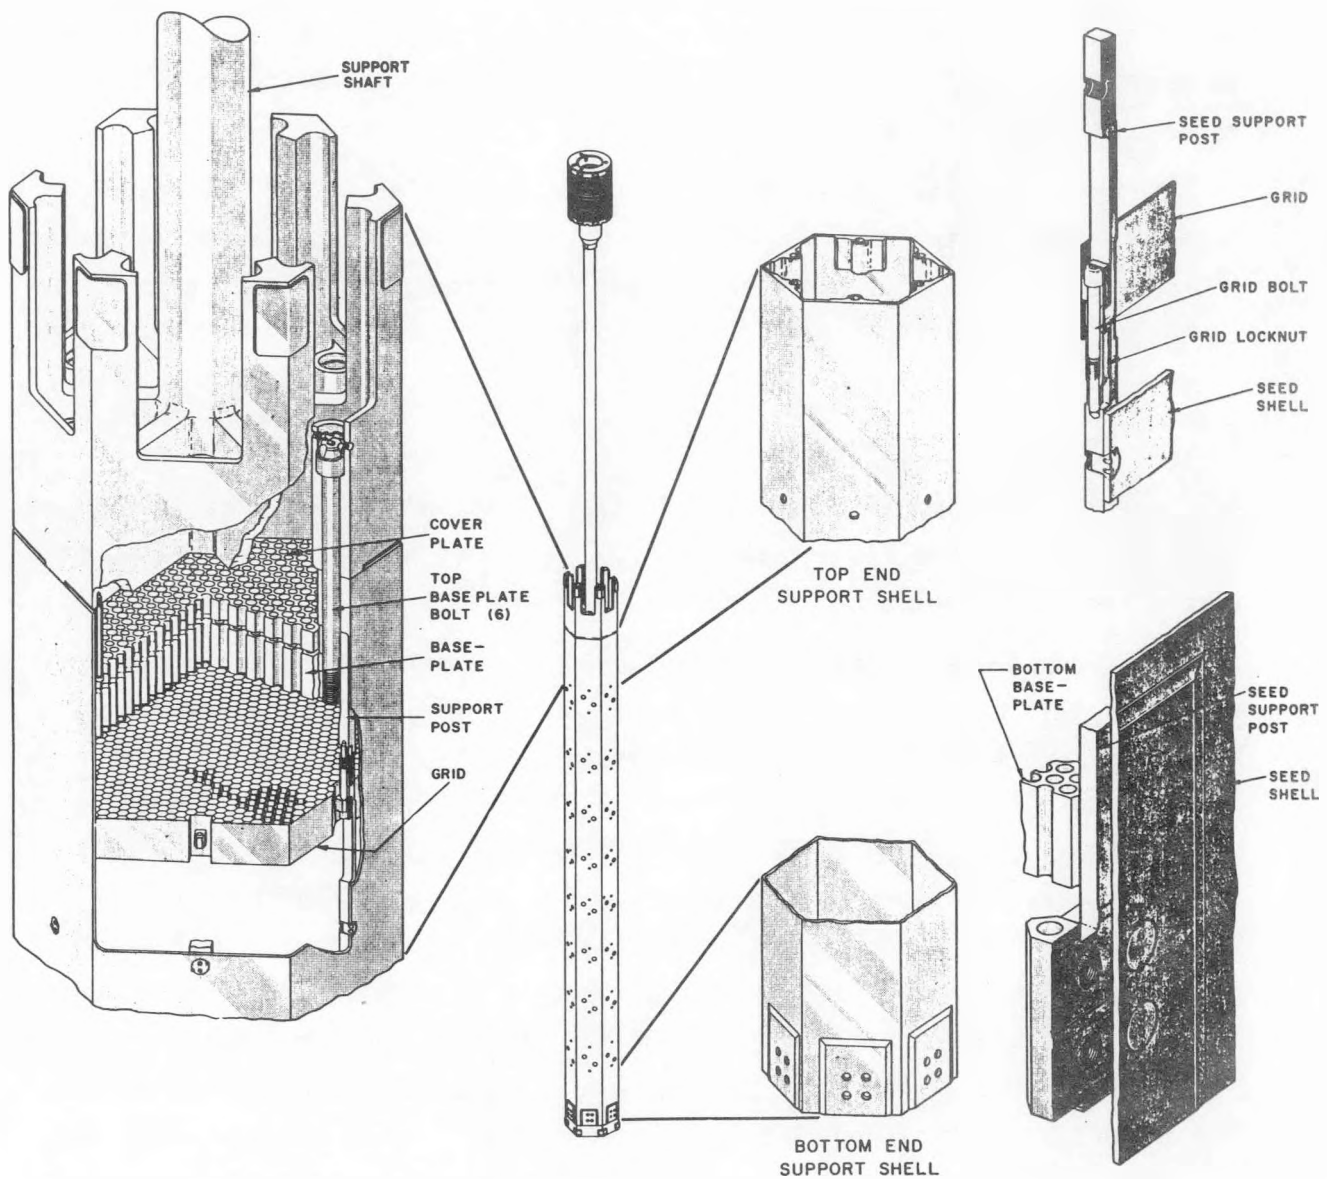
LWBR Movable Fuel Seed Module Assembly
